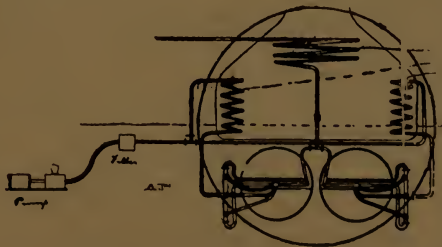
ARRANGEMENT FOR BURNING OIL FUEL APPLIED TO BOILERS.
